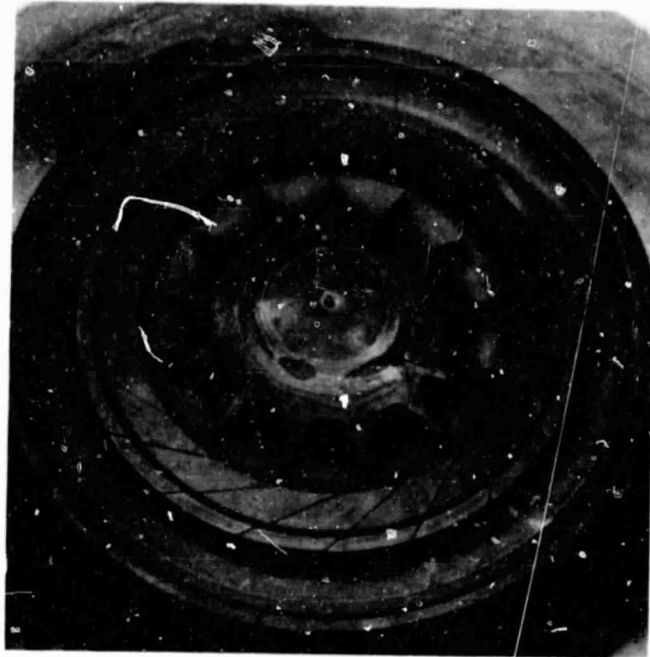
Turbine Rotor Backface Metal Shavings Deposited on Turbine Backshroud.
